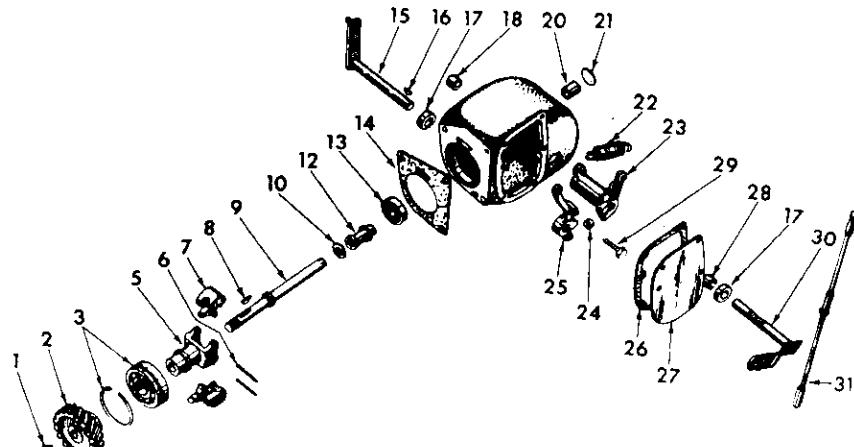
Exploded view of the governor used on Series B-414 and 354 non-diesel engines.
